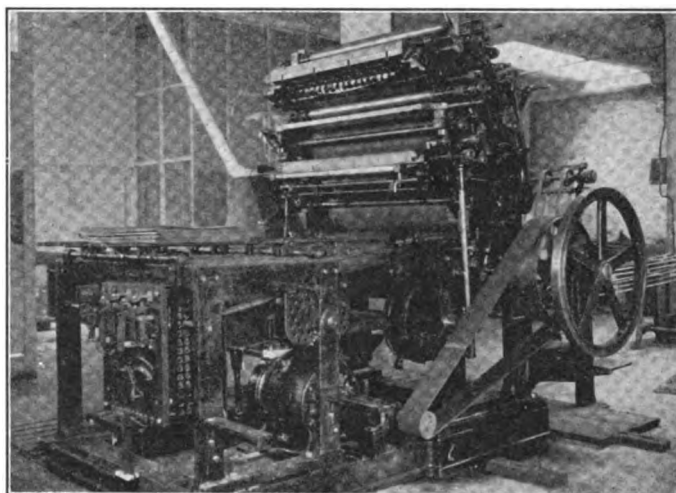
ROTARY METAL DECORATING PRESS EQUIPPED WITH D-C. MOTOR AND PUSH-BUTTON OPERATED CONTROLLER
